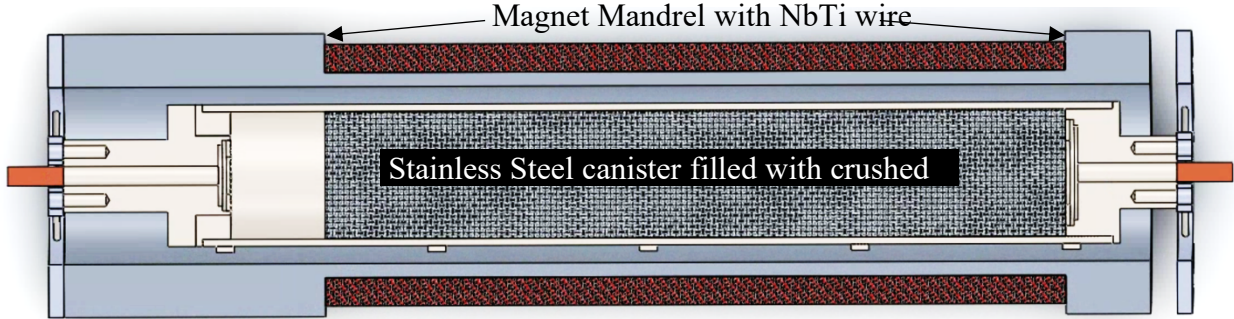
Cross-sectional view of the final regenerator design, which includes the canister, suspension, and magnet.
